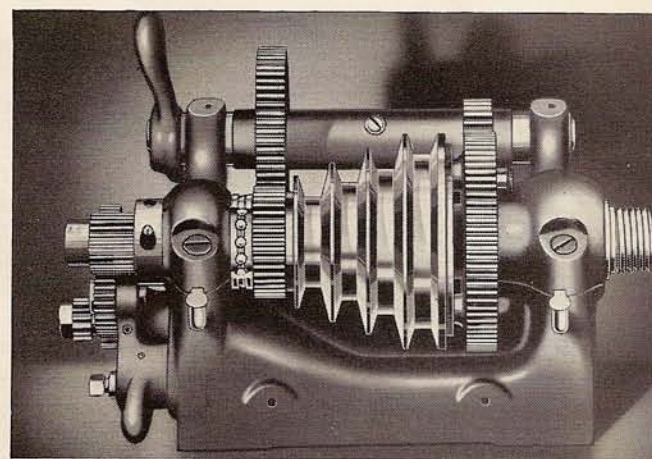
Headstock of 9-inch "Workshop" Lathe (with Gear Guards Removed) Showing 4-Step Cone Pulley for V-Belt Drive
